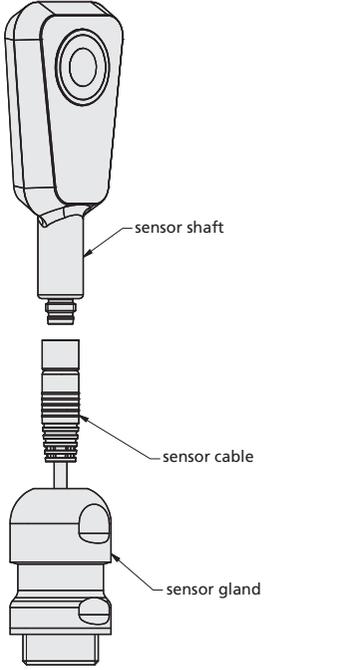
Mounting of pms sensor with sensor screw connection BF-pms/A1
